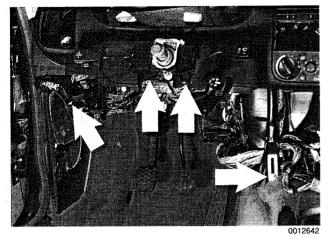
Reinforcement bar bolts (arrows). Shear (headless) bolts at steering column will have to be drilled out and replaced during reinstallation.
